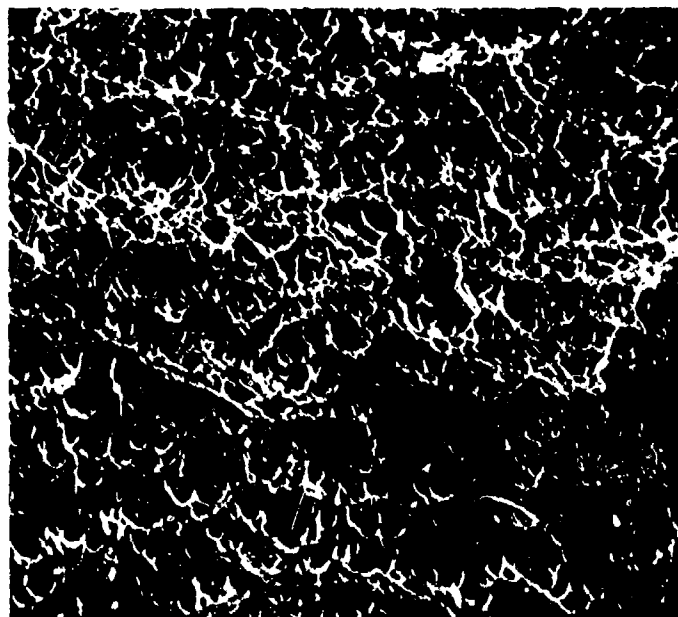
Transition region on tensile fracture surface of an A-514 weldment, 1800x.
